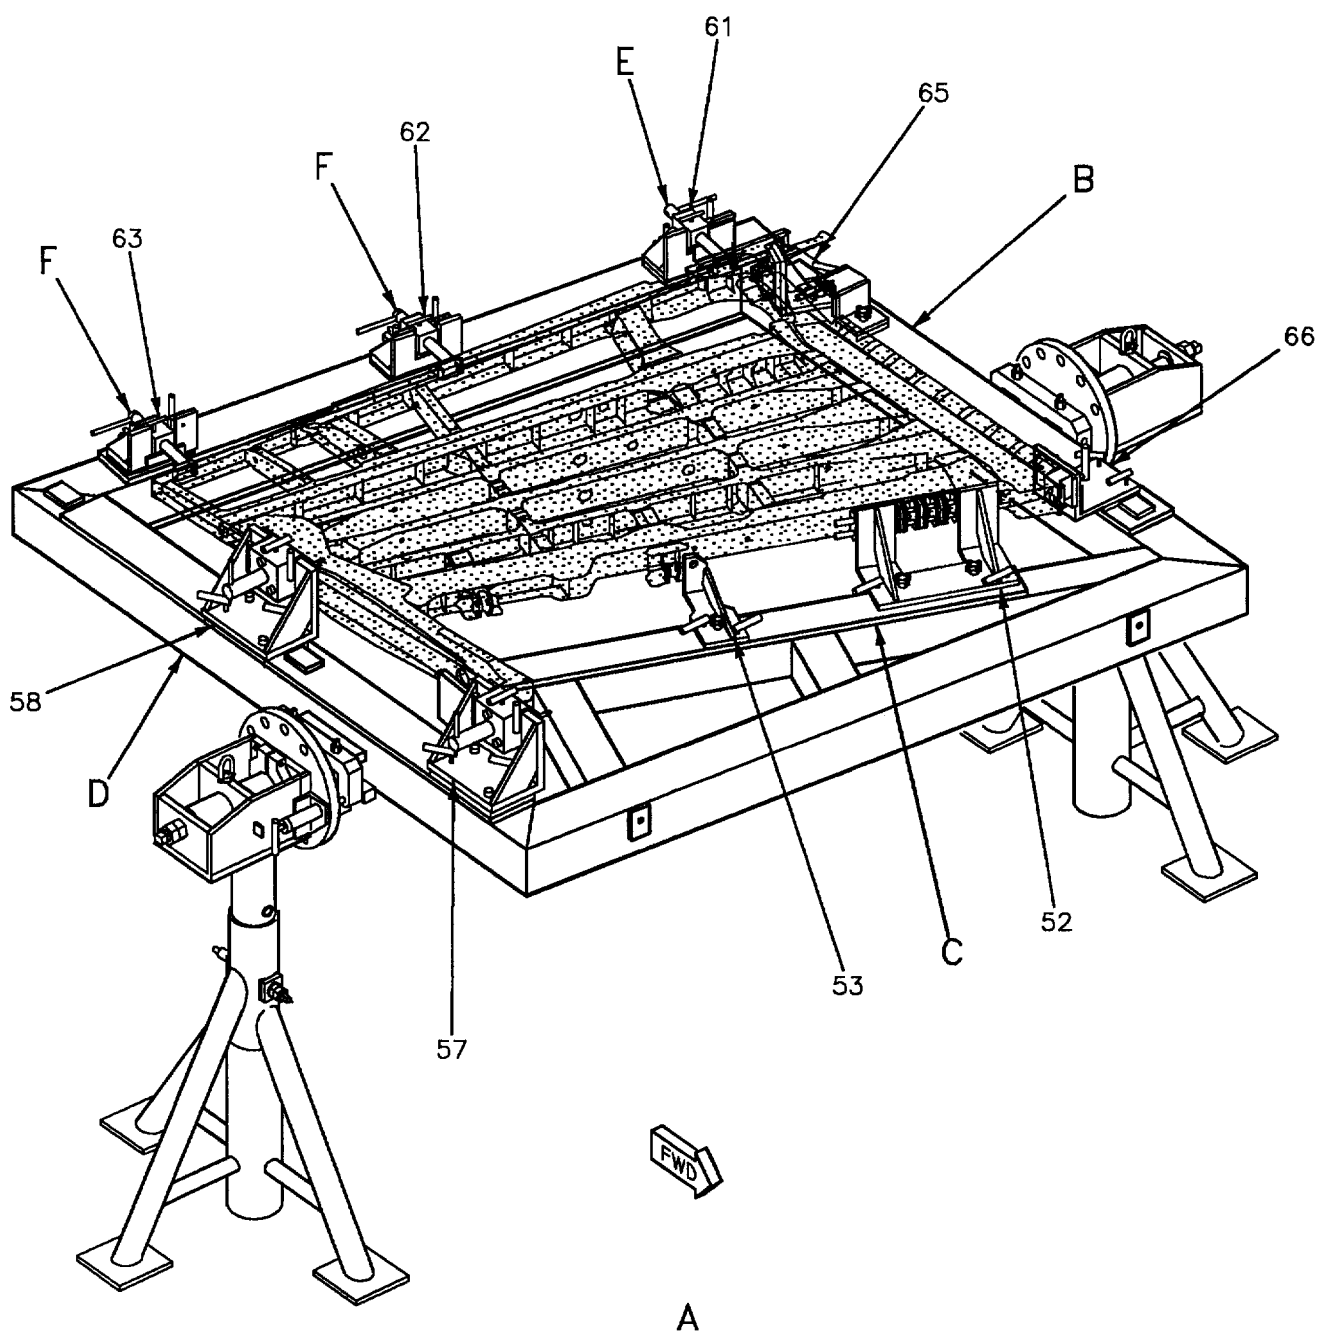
Installation of Outer Wing into Fixture (Sheet 2)
